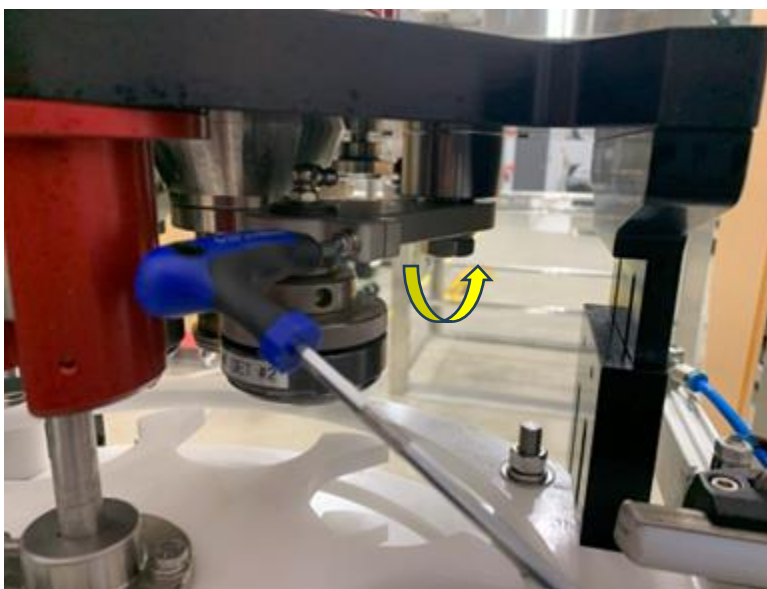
Vertical Adjustment Socket Head Screw Adjustment
